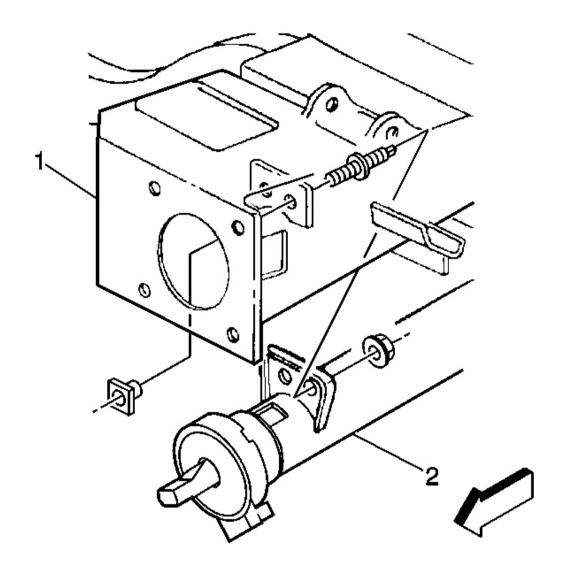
Lower Steering Column Support Plate & Nuts Courtesy of GENERAL MOTORS CORP.
